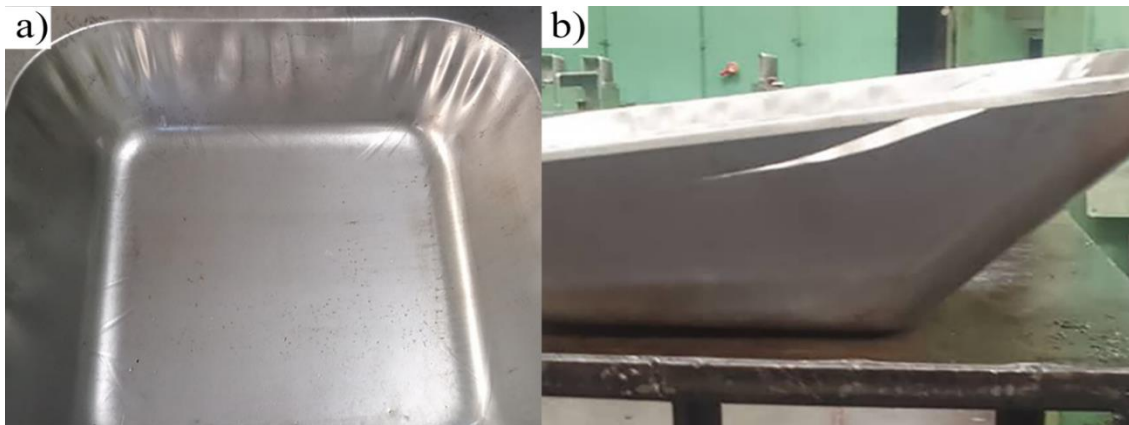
Deep drawing defects: (a) Wrinkling, (b) Rupture.
